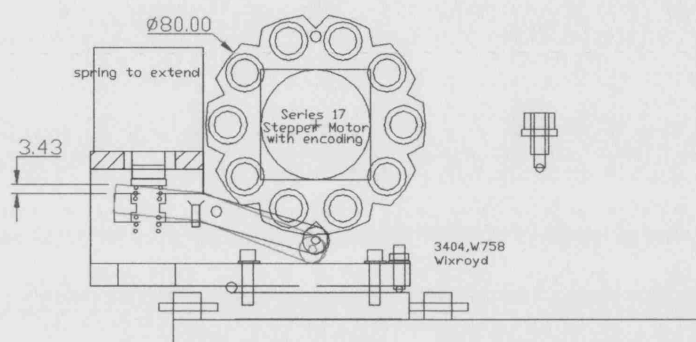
Drawing of the OSCA wheel assembly (Andy Charalambous), showing how the detent arm is moved up and down to lock the wheel in place.
